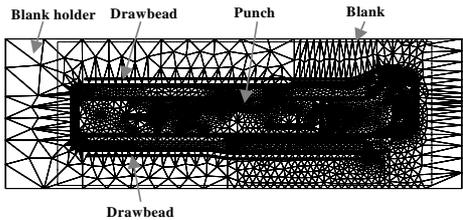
Locations of draw-bead in the sheet metal forming die for an inner panel.
